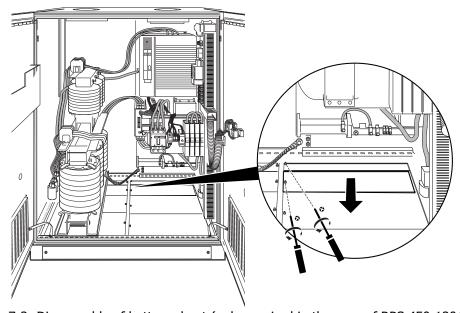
Disassembly of bottom sheet (only required in the case of RPS 450-120/170)
